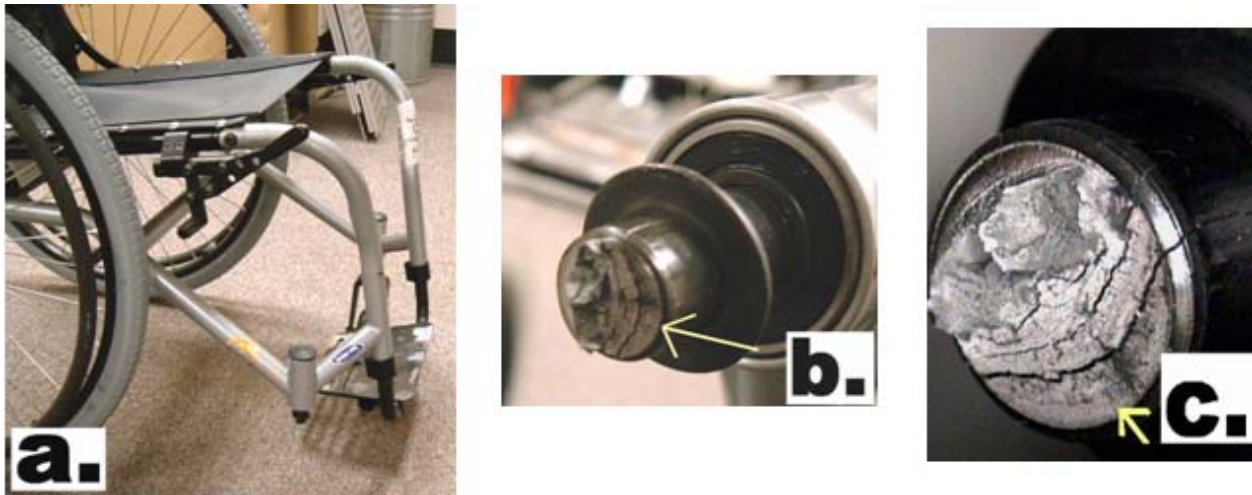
Caster stem fracture of an Invacare-A4 wheelchair. Picture a. shows the location of caster stem fracture. Pictures b. and c. show the fracture surface, and the arrows indicate the start of crack that eventually developed as fatigue fracture.
